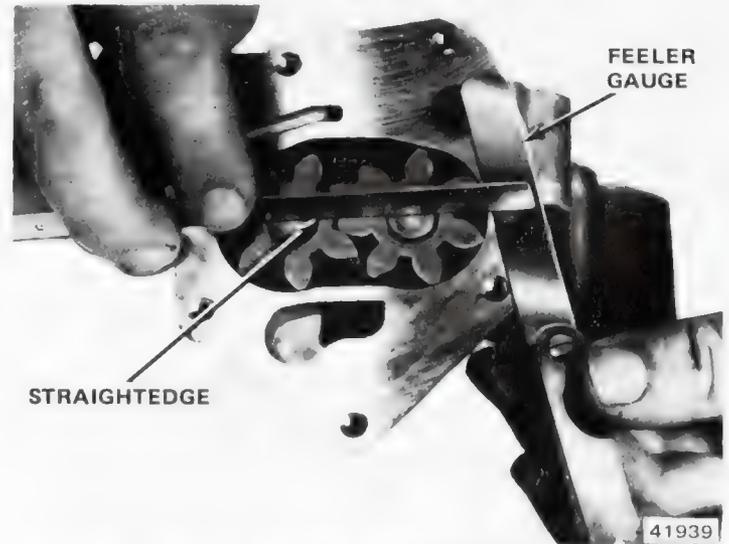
B-151 Gear End Clearance Measurement—Feeler Gauge Method
